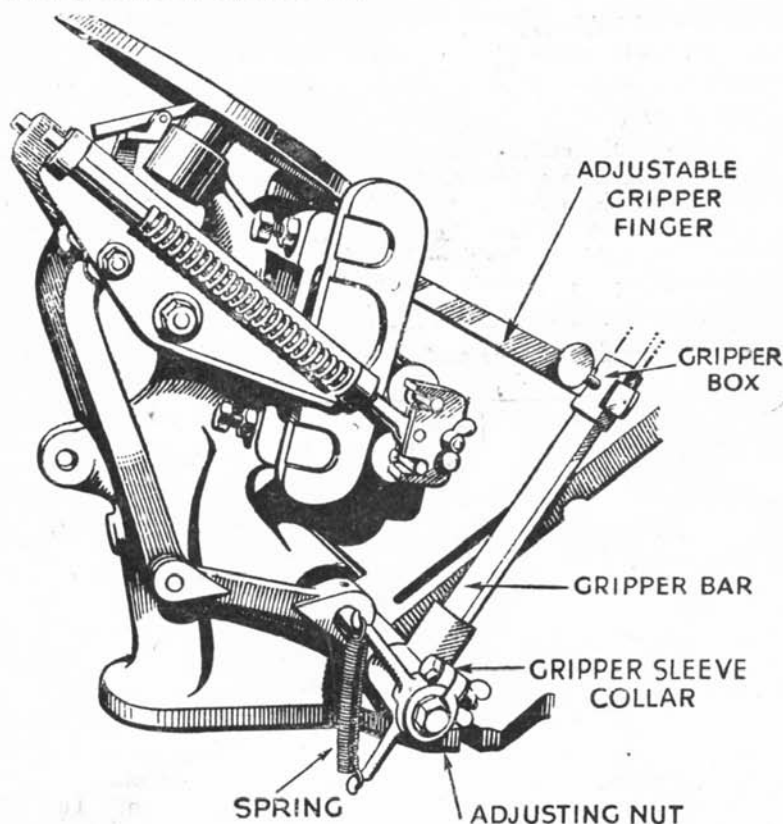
Gripper Finger Adjustments on No. 2 High Speed Machine
